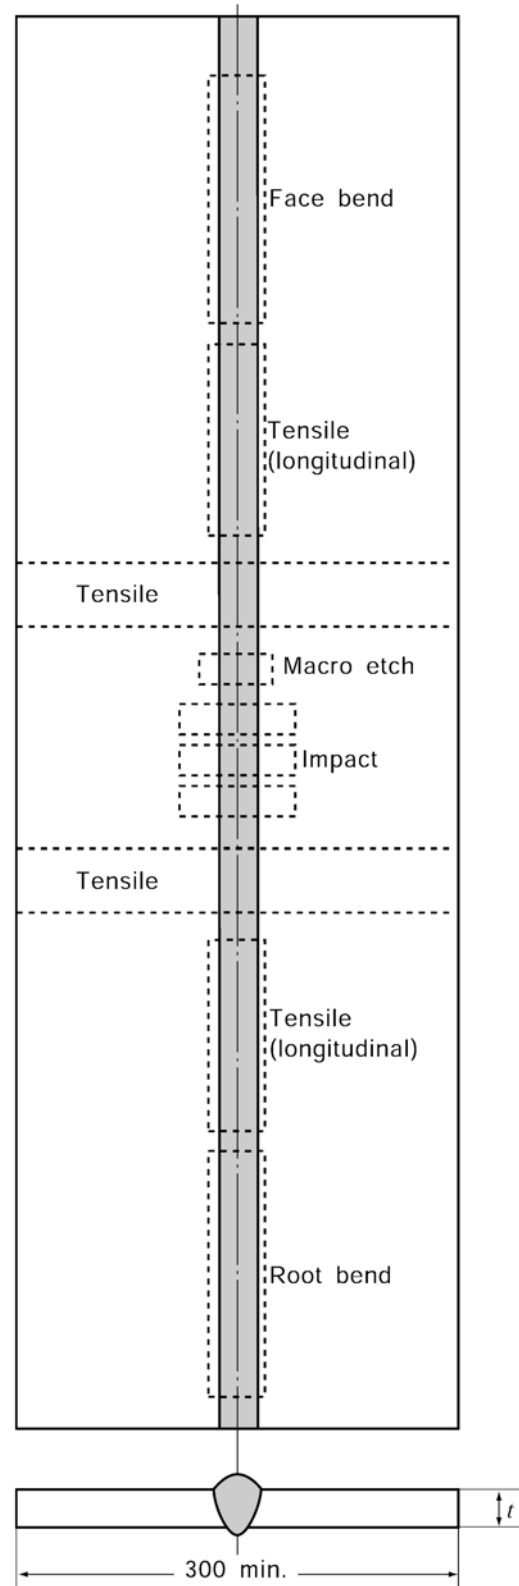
Welding procedure test assembly (Unit : mm) (cont'd)
